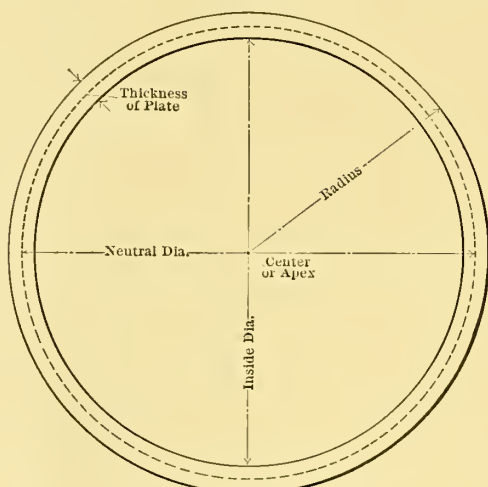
SECTION SHOWING DIMENSIONS OF SHELL PLATE.
